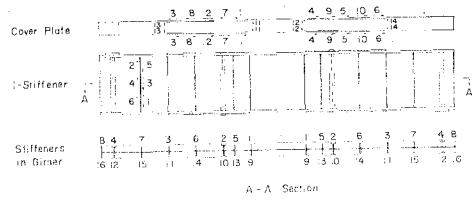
Weld Procedure of 2nd Member, Stiffeners and Cover Plates
